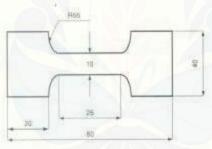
Tensile Test Specimens (according to ASTM D638-94 in Chang et al, 2000)
